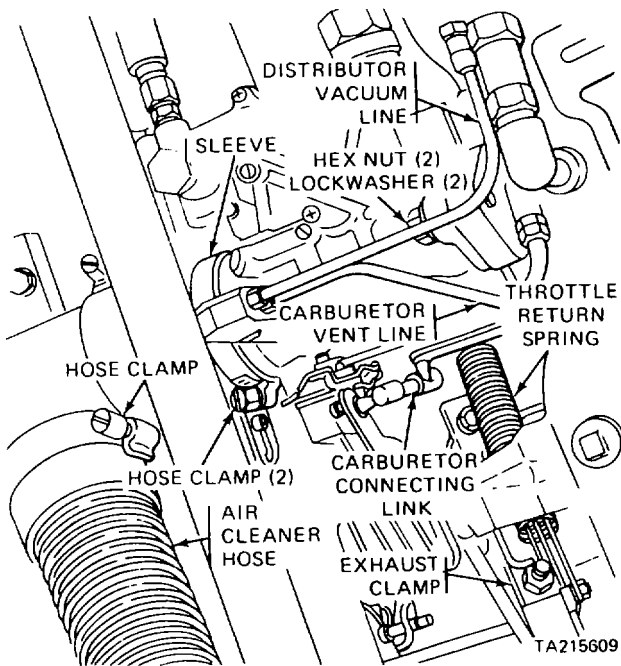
Engine and Transmission Replacement - Air Intake Sleeve and Exhaust Clamp Removal
